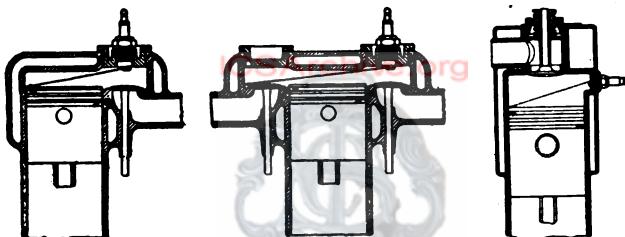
Sections Showing L-Head, T-Head, and Straight-Head Cylinders
